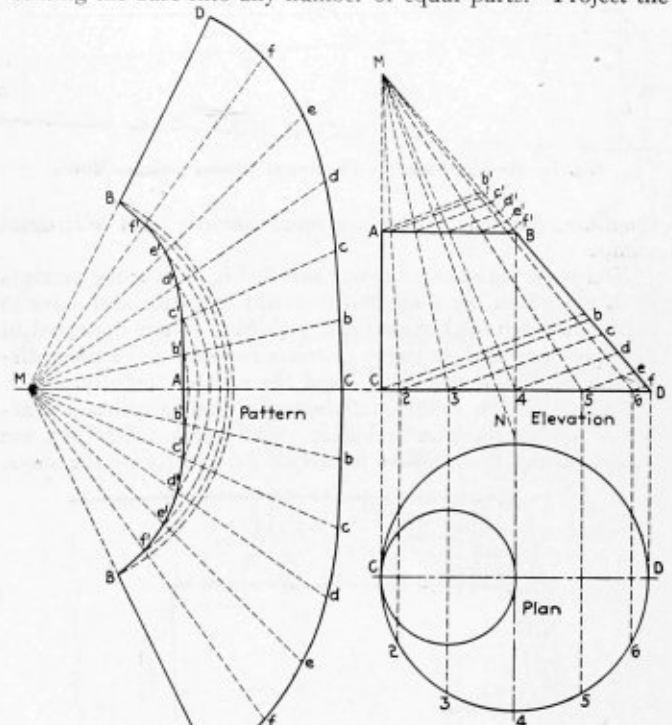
Pattern, Elevation and Plan of Eccentric Cone
